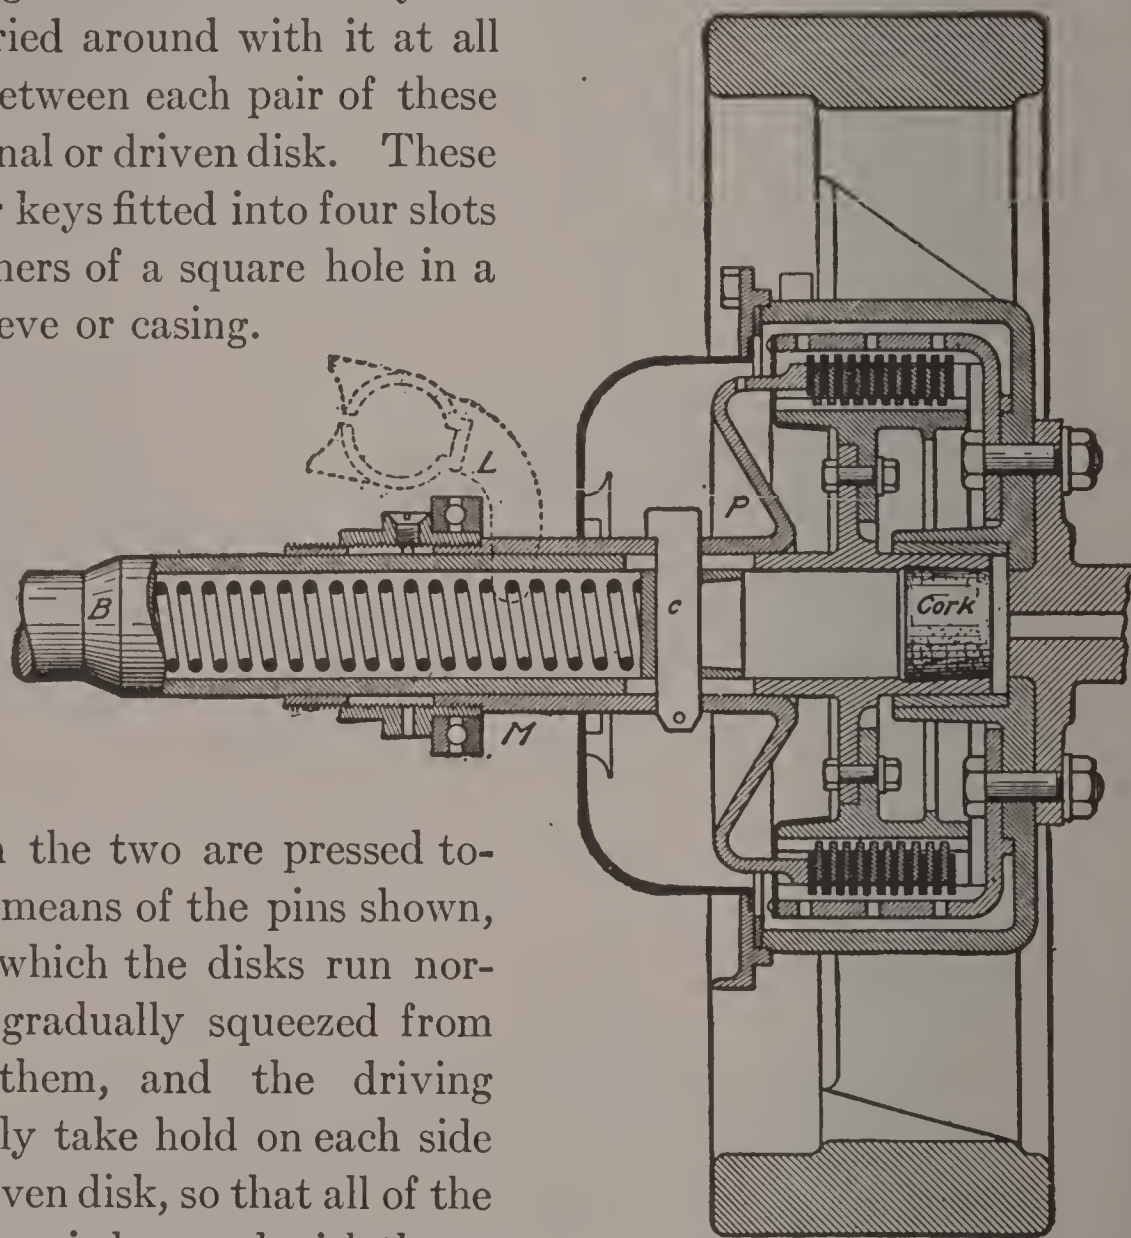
Panhard Disk Clutch with Spring Fully Enclosed
